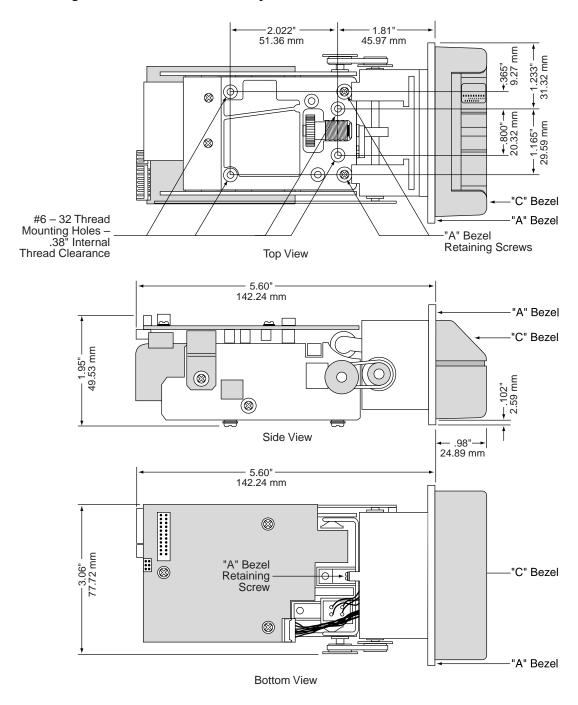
"C" Bezel Mounting – Top, Side, and Bottom Views
